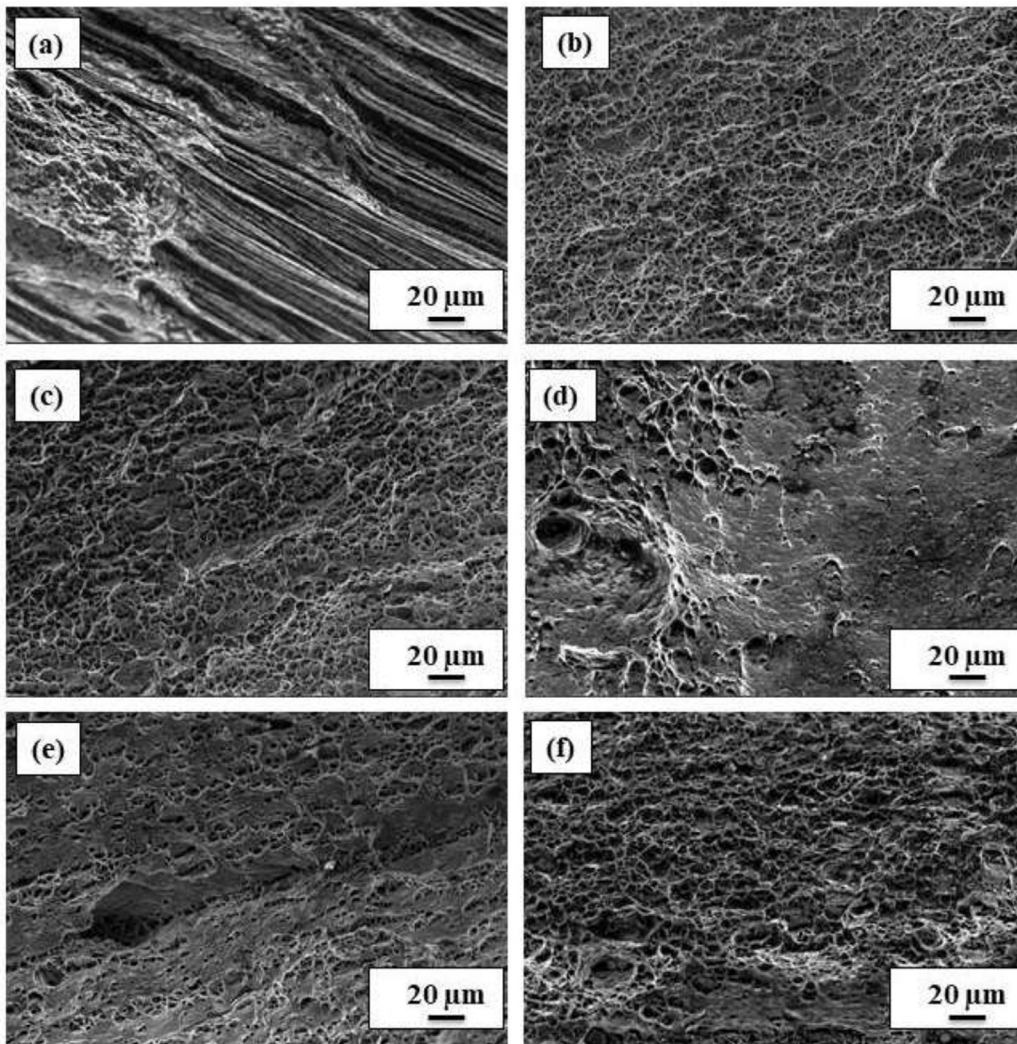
Fracture surface of welded joints (a) W1; (b) W2; (c) W3; (d) W4; (e) W5; (f) W6.
